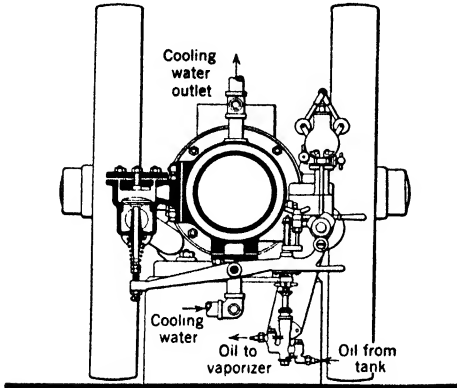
Transverse section through cylinder of type "IIA" oil engine.
